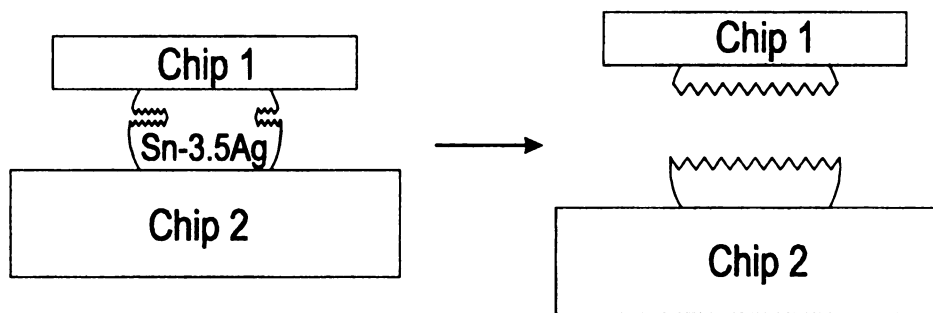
Schematic illustration of geometry of and cracking in the controlled-collapsed chip (flip chip) Sn-3.5Ag solder joint [51].
